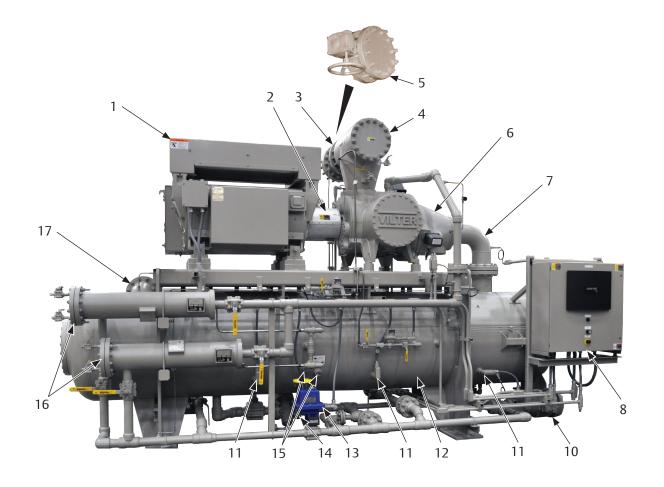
Gas Compressor Unit Components (1 of 3)
